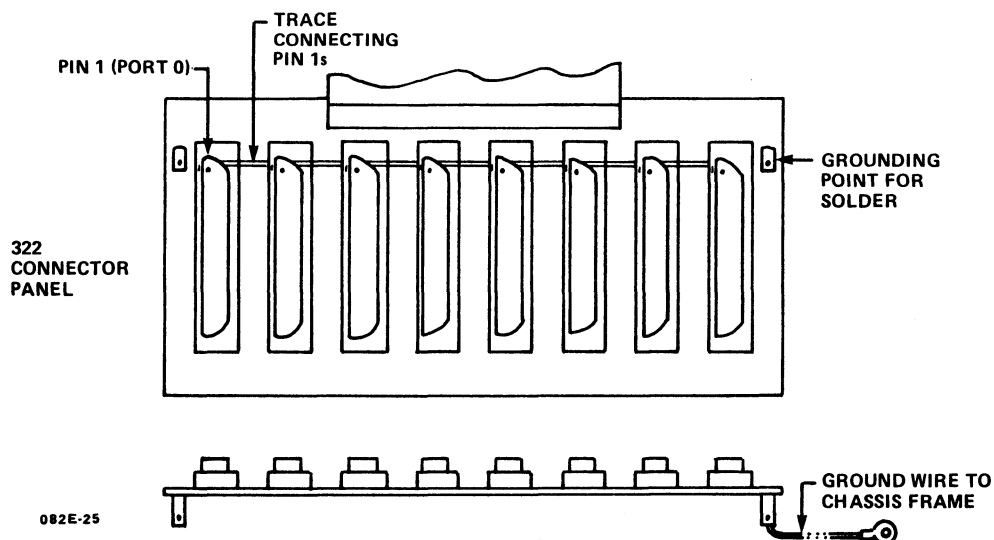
Chassis Ground Points on a 322 Connector Panel
